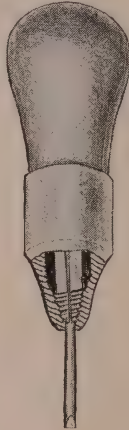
Section of Bradawl, showing how the Jaws Grip the Blade
